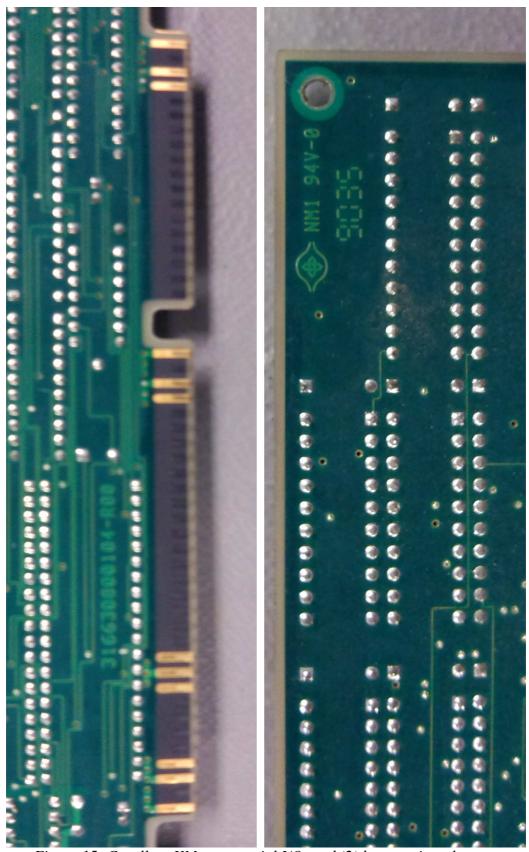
Corollary XM spare serial I/O card (2) bottom view closeups
